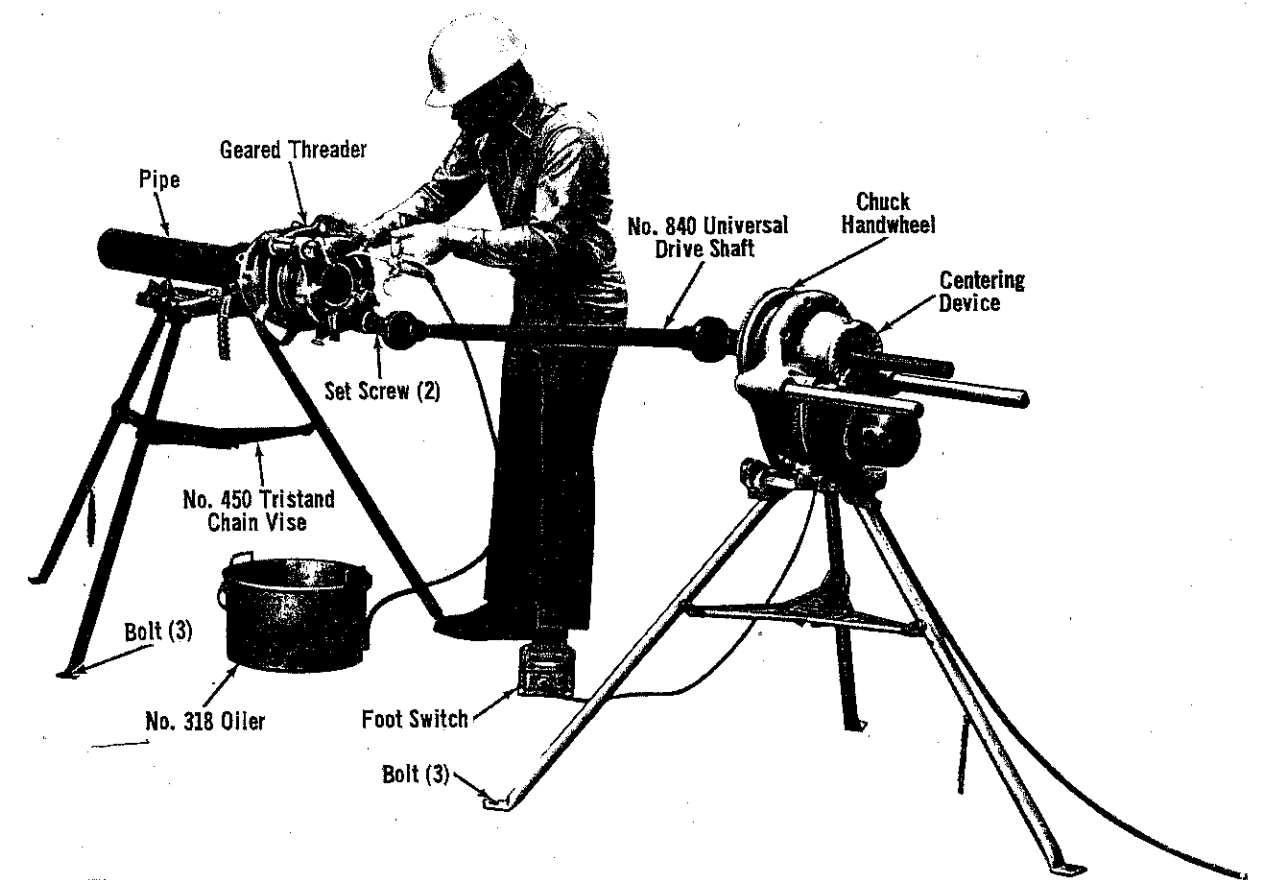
Threading with Nos. 141, 161, and 4PJ Geared Threaders using No. 840 Universal Drive Shaft.
